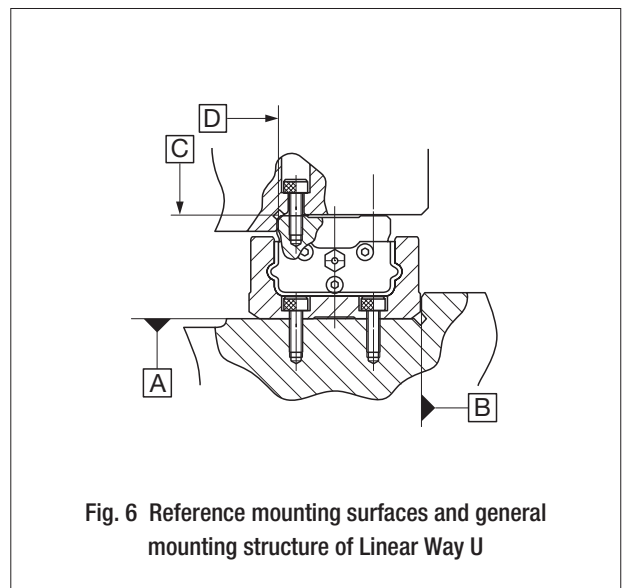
Reference mounting surfaces and general mounting structure of Linear Way U
